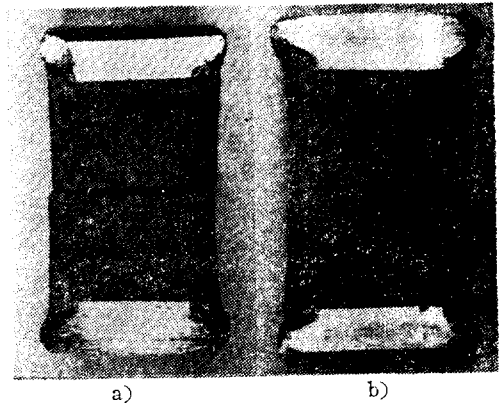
Fracture appearance of Charpy specimens. (B-CPSN)
